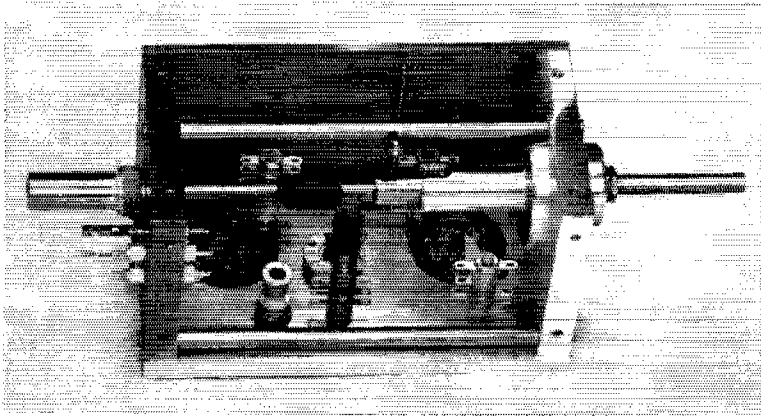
In this view of the partially-assembled p.t.o. unit, the coil has been omitted to expose the tuning slug mounted on the driving shaft. The front bearing guide is notched for the arm that prevents rotation of the slug shaft to permit full lateral movement of the slug. The knurled aluminum sleeve at the left-hand end covers that end of the slug shaft and the coil spring that prevents backlash.
